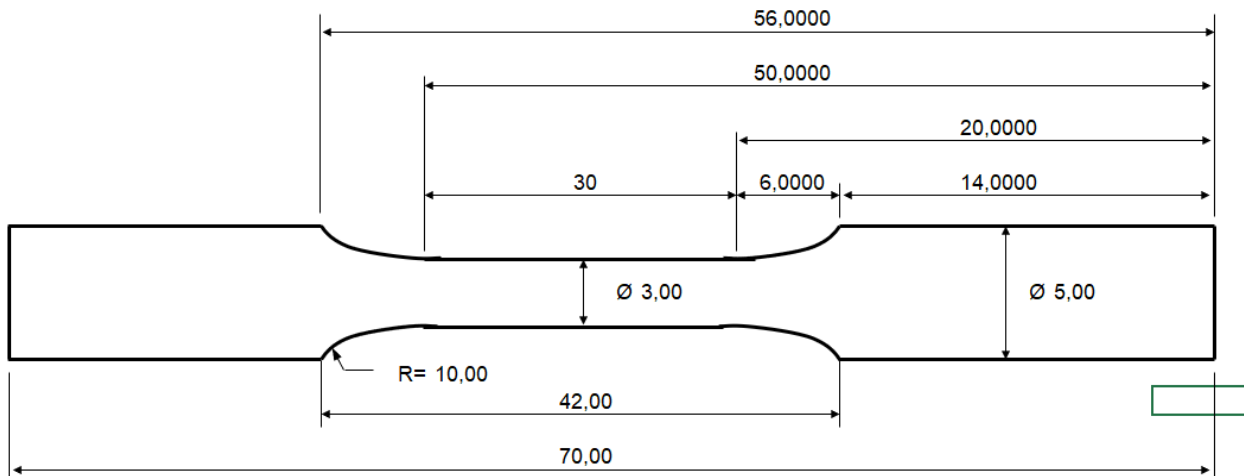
Dimensions of the smallest tensile testing samples used. All values in mm.
